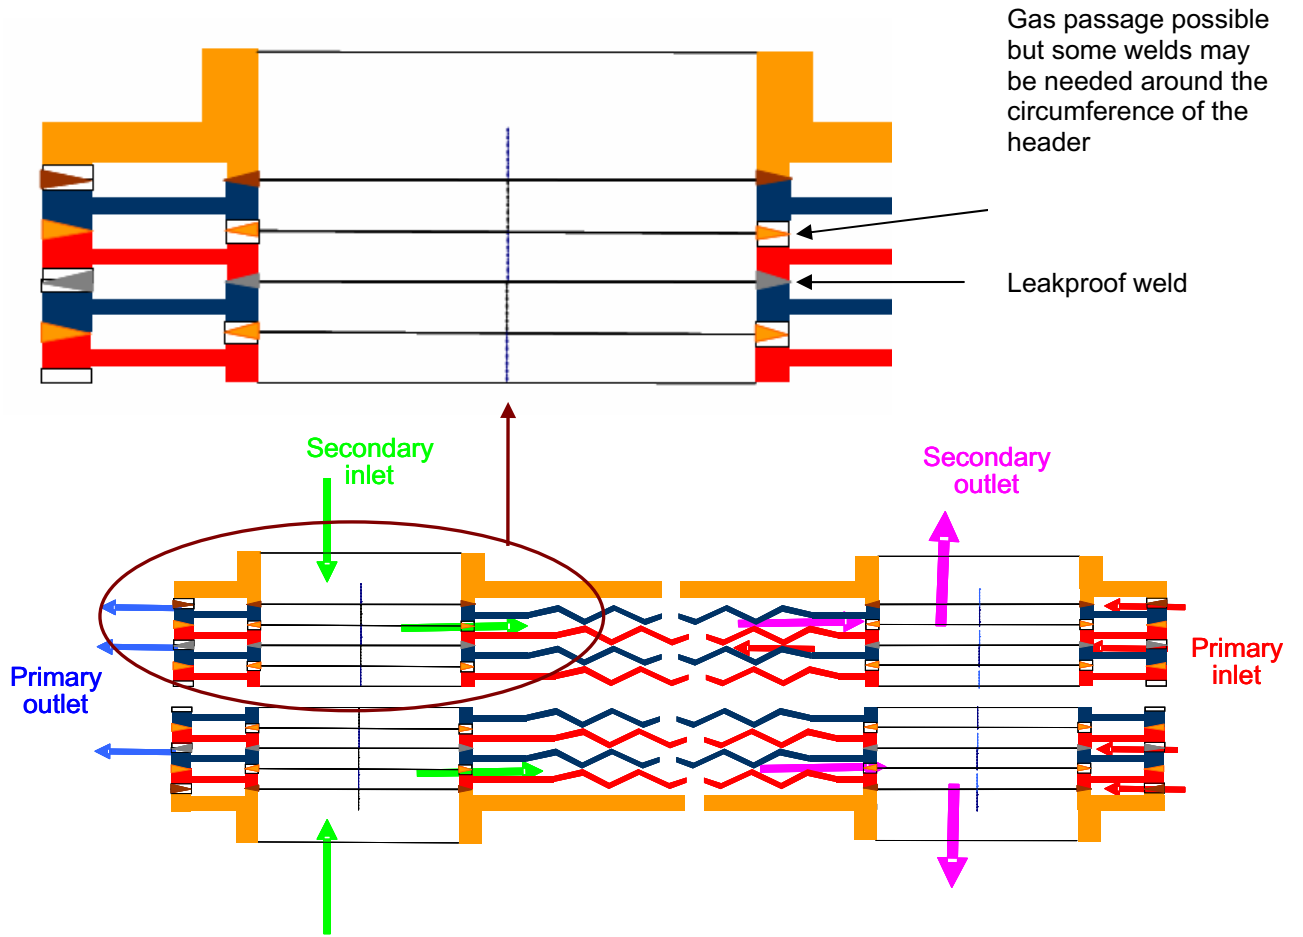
DETAIL OF FLOW PATHS AND WELDED JOINTS IN A PSHE MODULE
